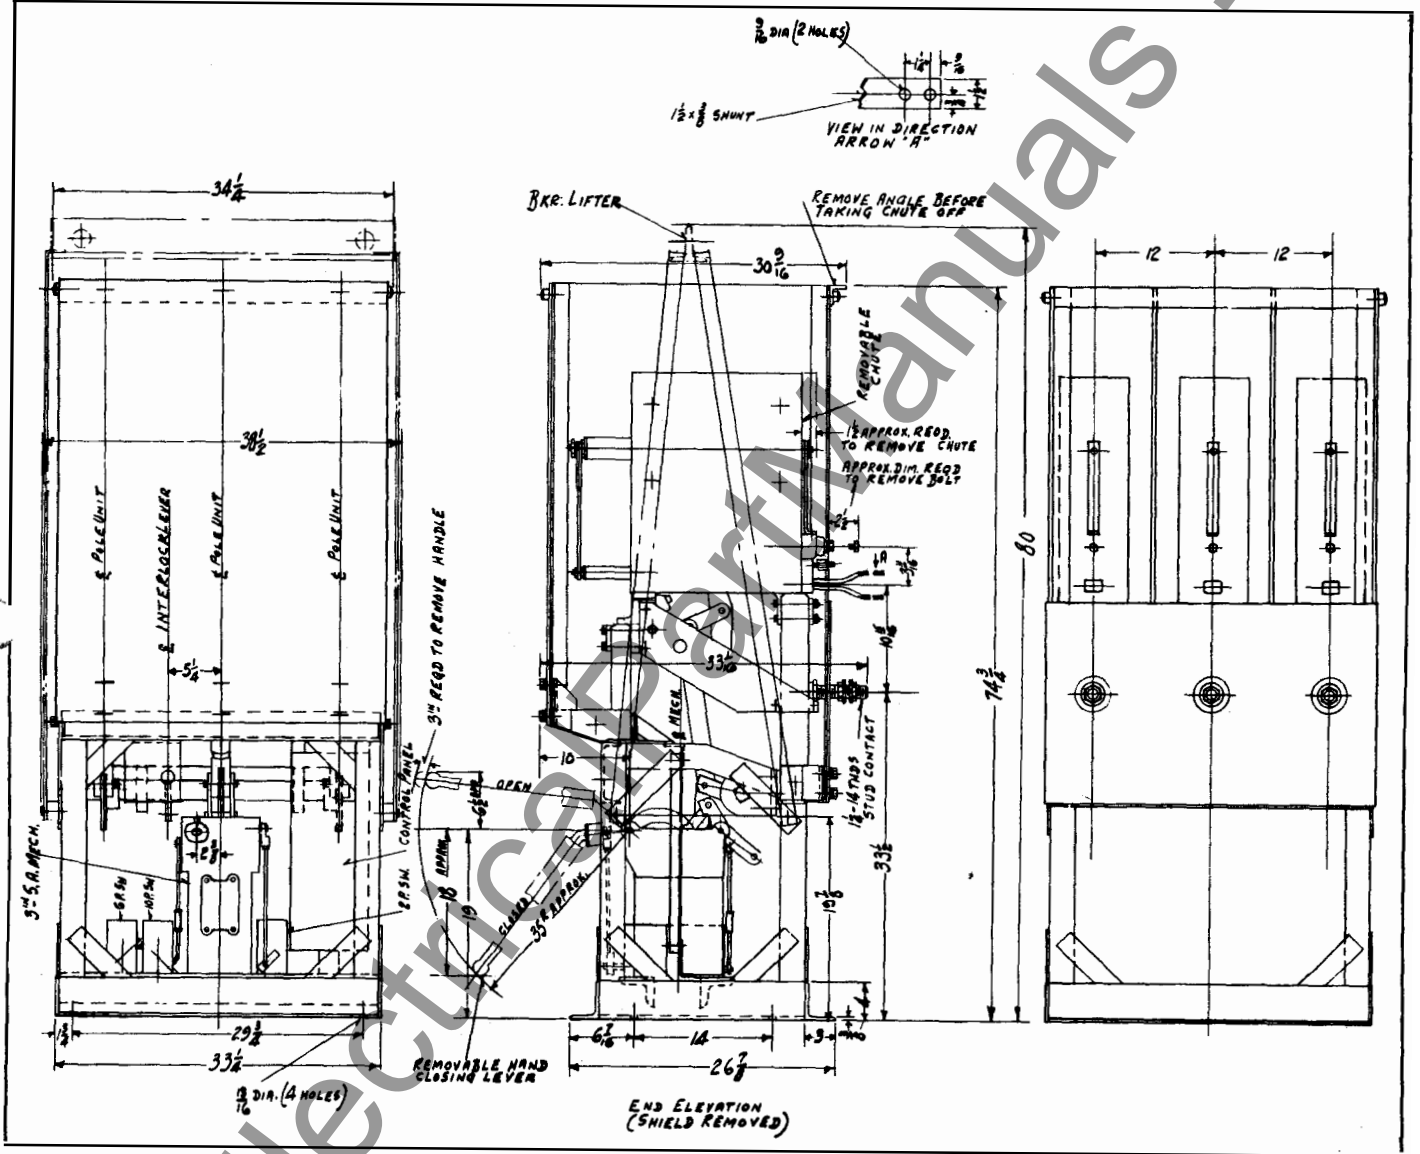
Outline Drawing for Typical Type "U" De-Ion Air Circuit-Breaker, Floor Mounting, Rear Connected
